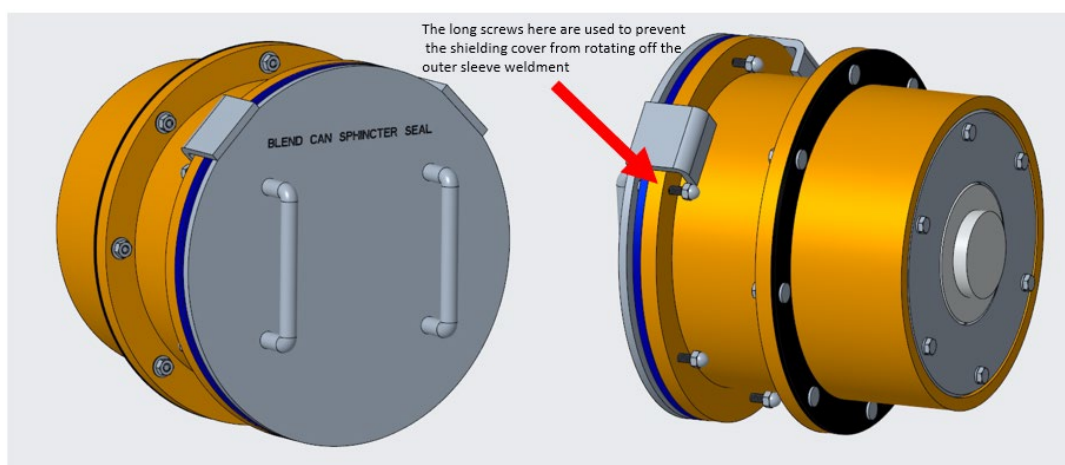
Blend Can Sphinxter Seal Shielding Cover Concept
